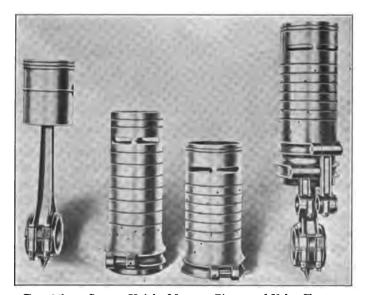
Stearns-Knight Motor — Piston and Valve Sleeves.
